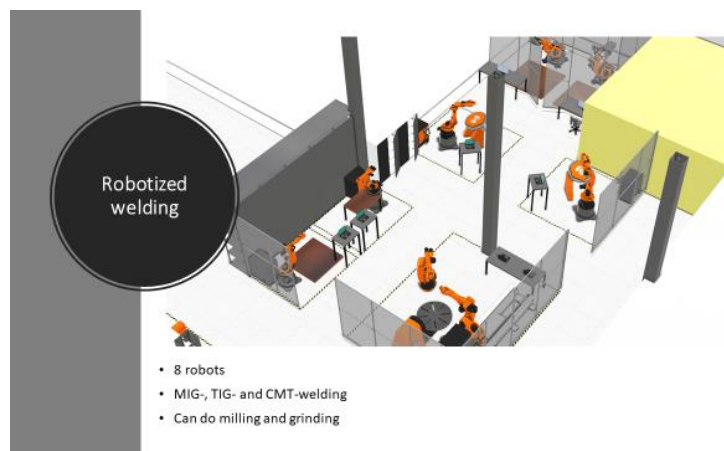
Robots for Welding, Milling and Grinding.
